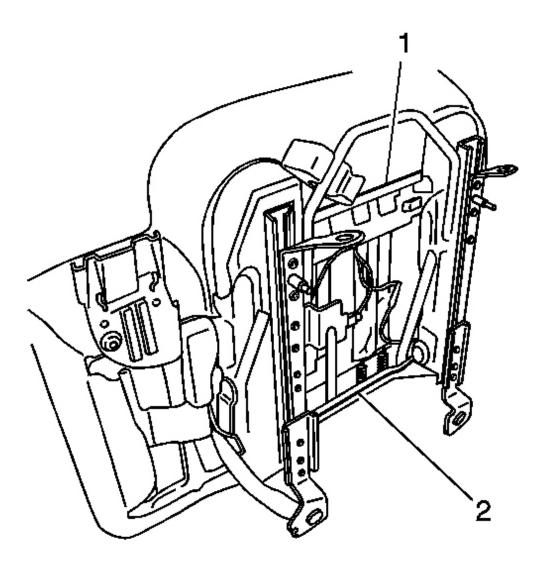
View Of Lumbar Adjustment Mechanism & Retaining Screws Courtesy of GENERAL MOTORS CORP.
